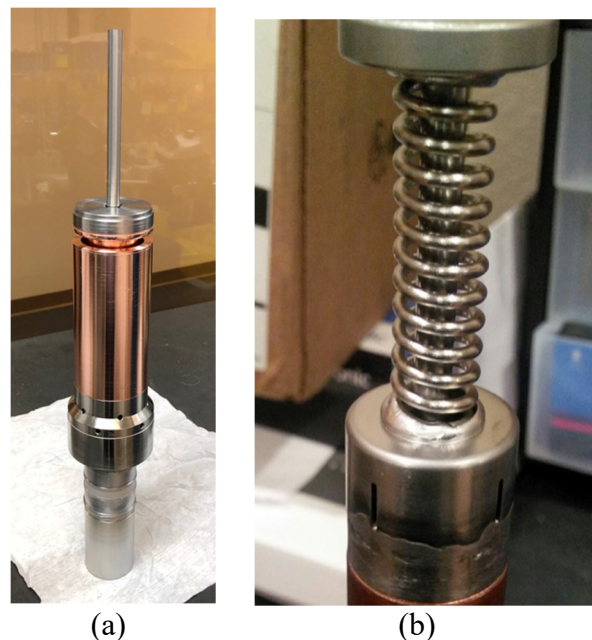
a) Cathode stalk ready for filament welds, b) example of the filament welds to be made.
